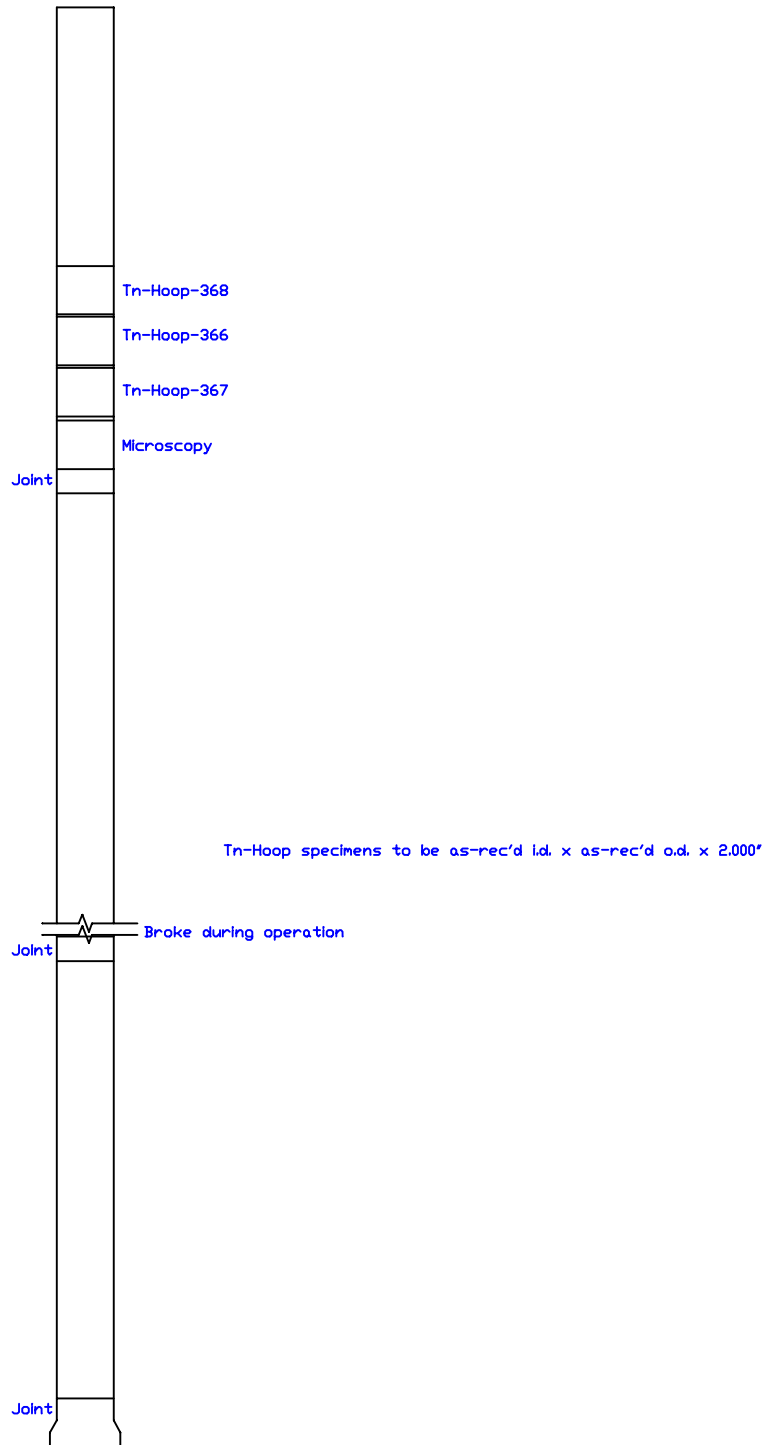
Cutting Plan for Pall Fe₃Al Element 21076
